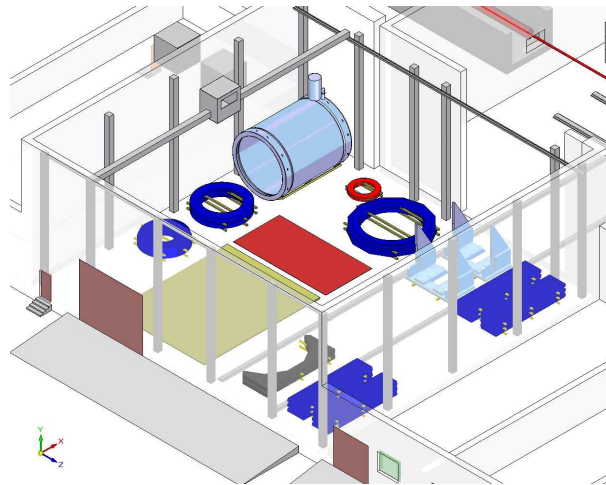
3D view of the magnet assembly area with allocated component parts
